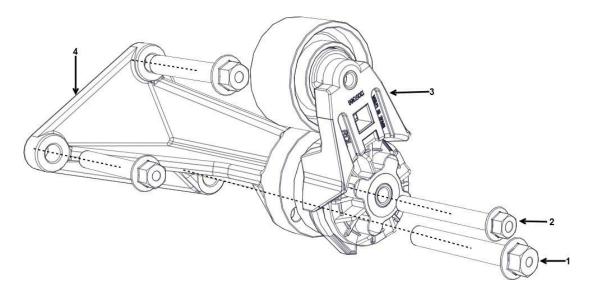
Right-Hand Automatic Belt Tensioner Assembly
